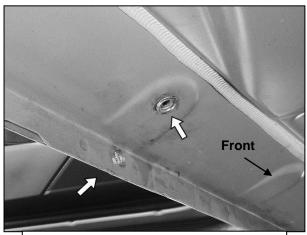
Use a 3/8" drill bit to enlarge mounting holes in floor for Insert installation (arrow). Do not drill through floor
